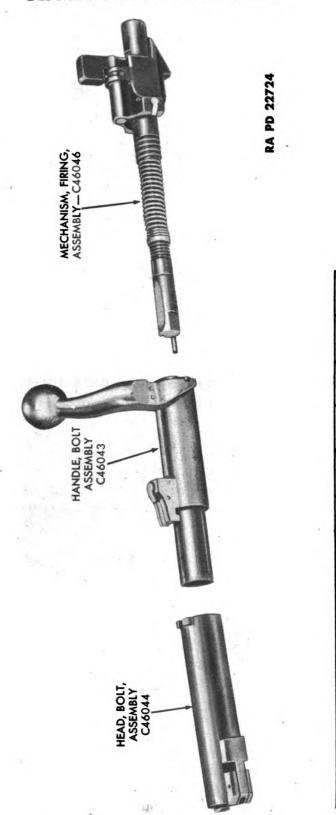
Bolt Subassemblies of U.S. Rifle, Cal. .22, M1 — Exploded View
